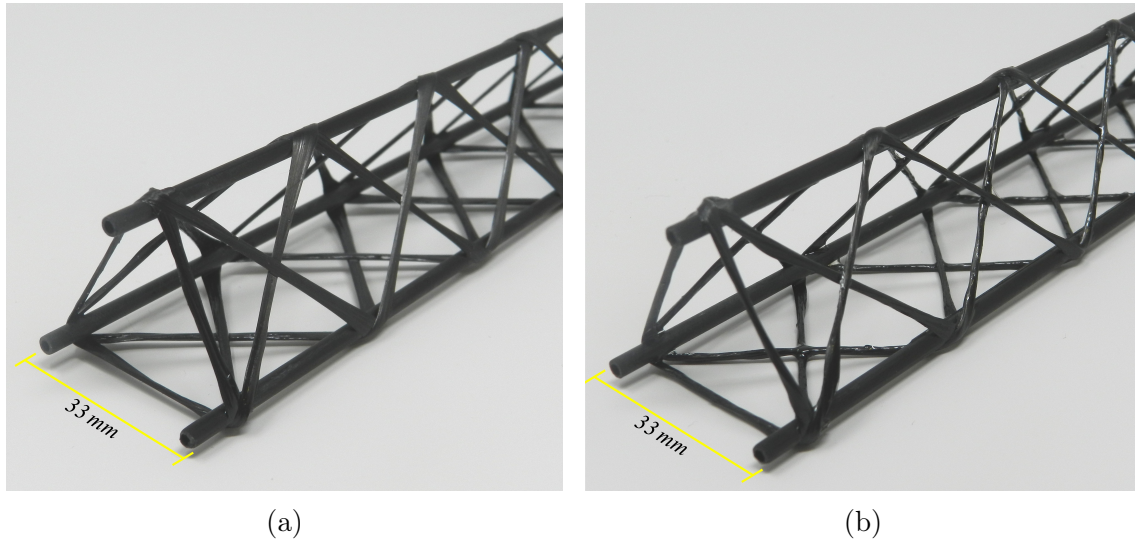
Truss shear member configurations: a) truss where shear members are not twisted ('flat'); b) truss with twisted shear members ('twisted').
